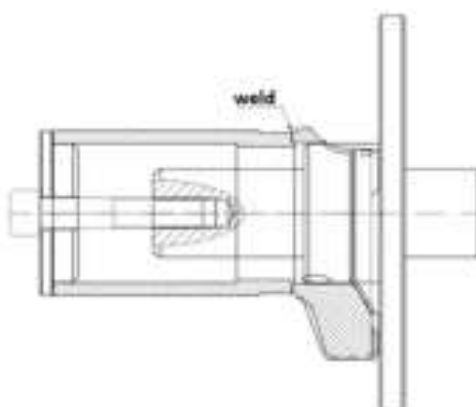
The clutch carrier (flange and outer ring) placed on the fixture.
